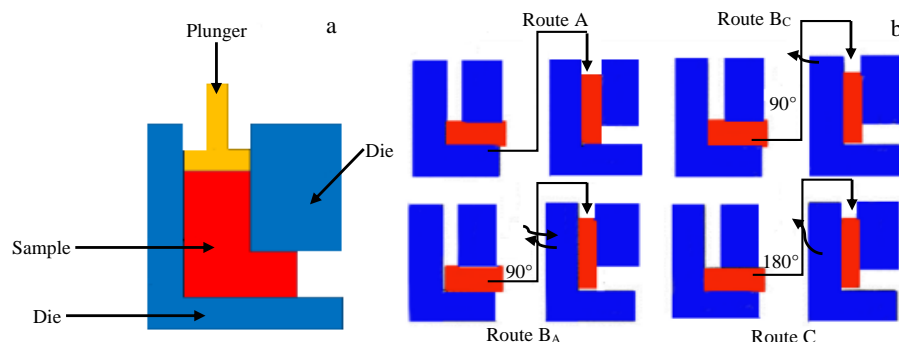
Typical conventional ECAP processing technique: (a) set-up and (b) pressing routes^[85]
